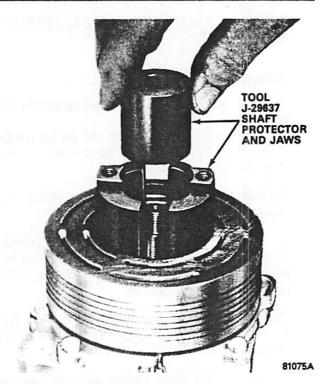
E-30 Removing Rotor Pulley with Jaws Installed
